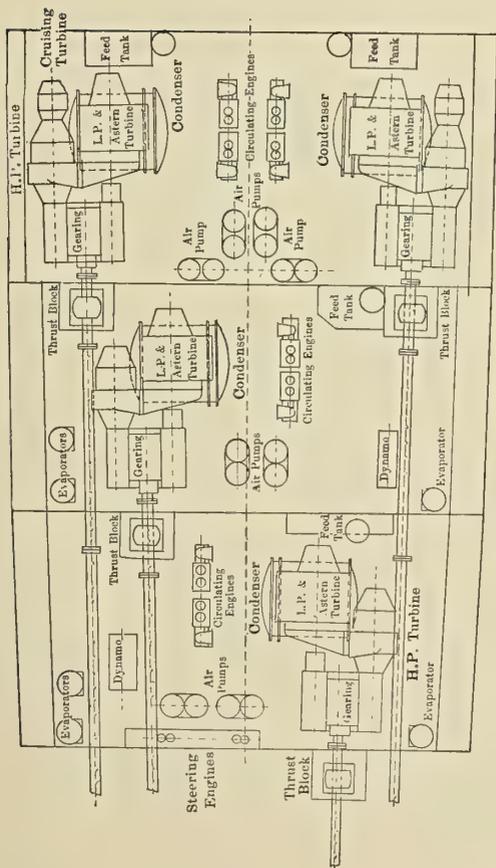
Plan of Machinery Installation, Battle Cruiser. Total Shaft Horsepower, 144,000; Revolutions of Propeller Shafts, 210; Revolutions of High Pressure Turbines, 1,497; Revolutions of Low Pressure Turbines, 1,096
